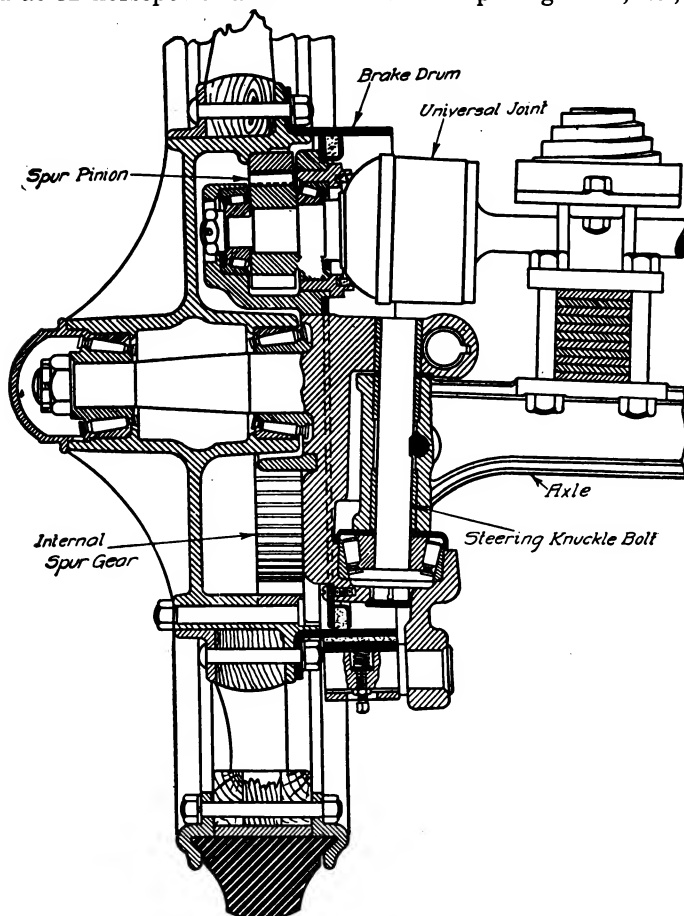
Sectional View of Jeffery Front-Wheel Drive
